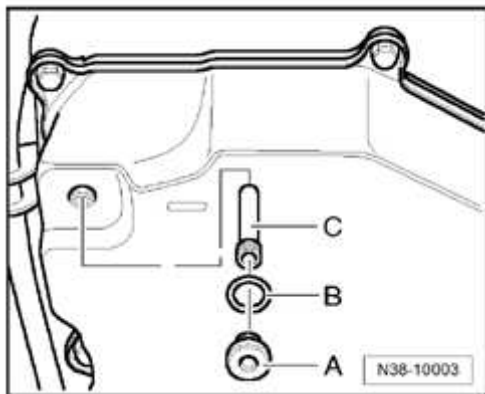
Identifying Overflow Tube, Check Plug And Sealing Ring
